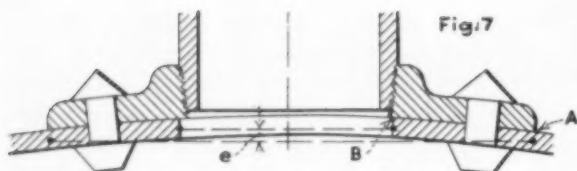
Riveted reinforcing flange, illustrating eccentricity
